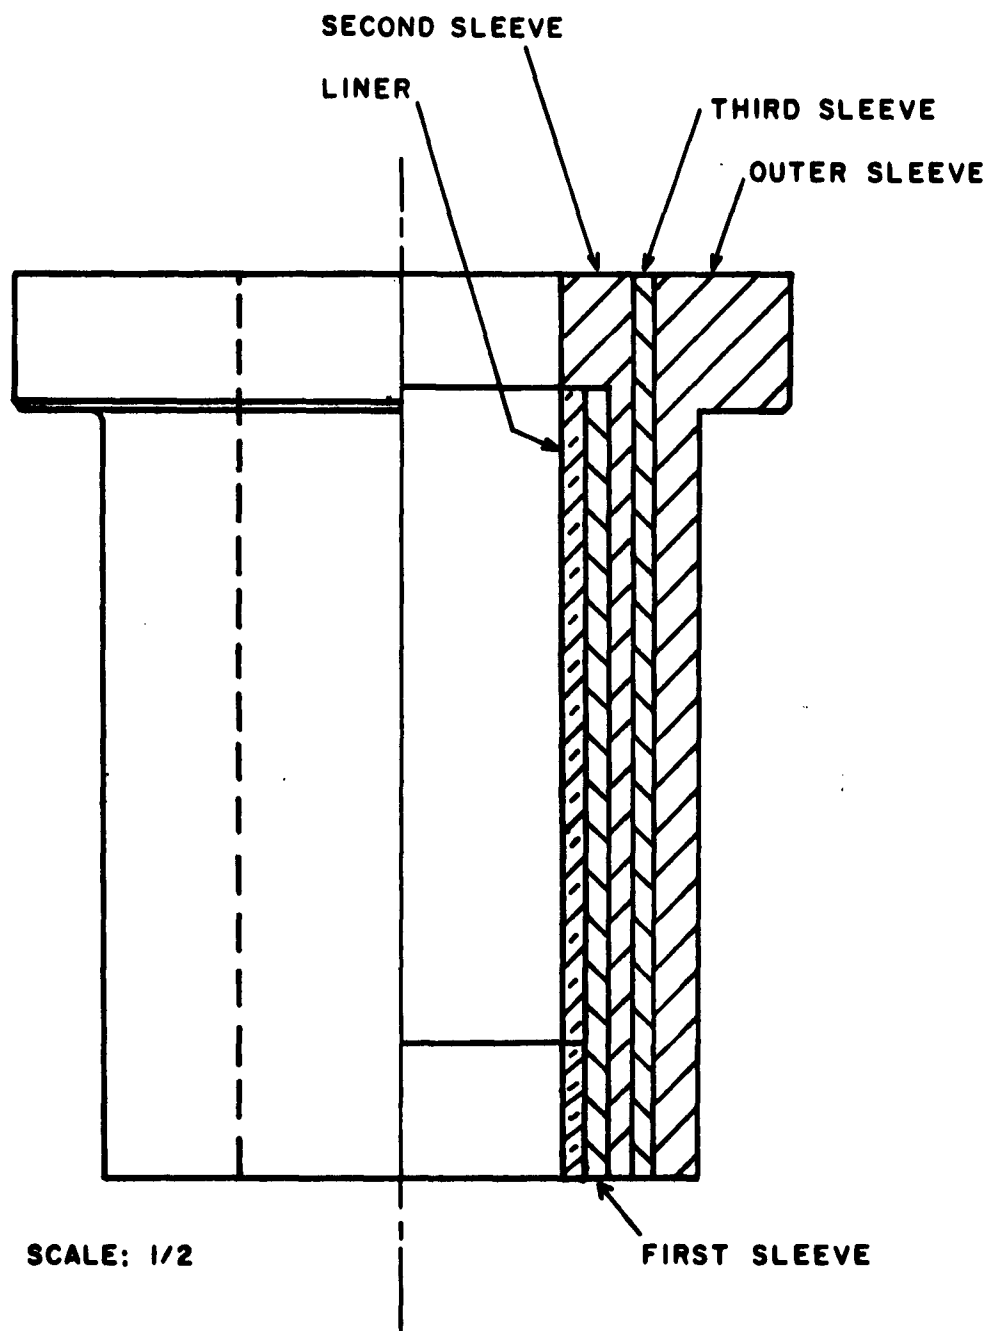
LINER AND 4-SLEEVE ASSEMBLY
